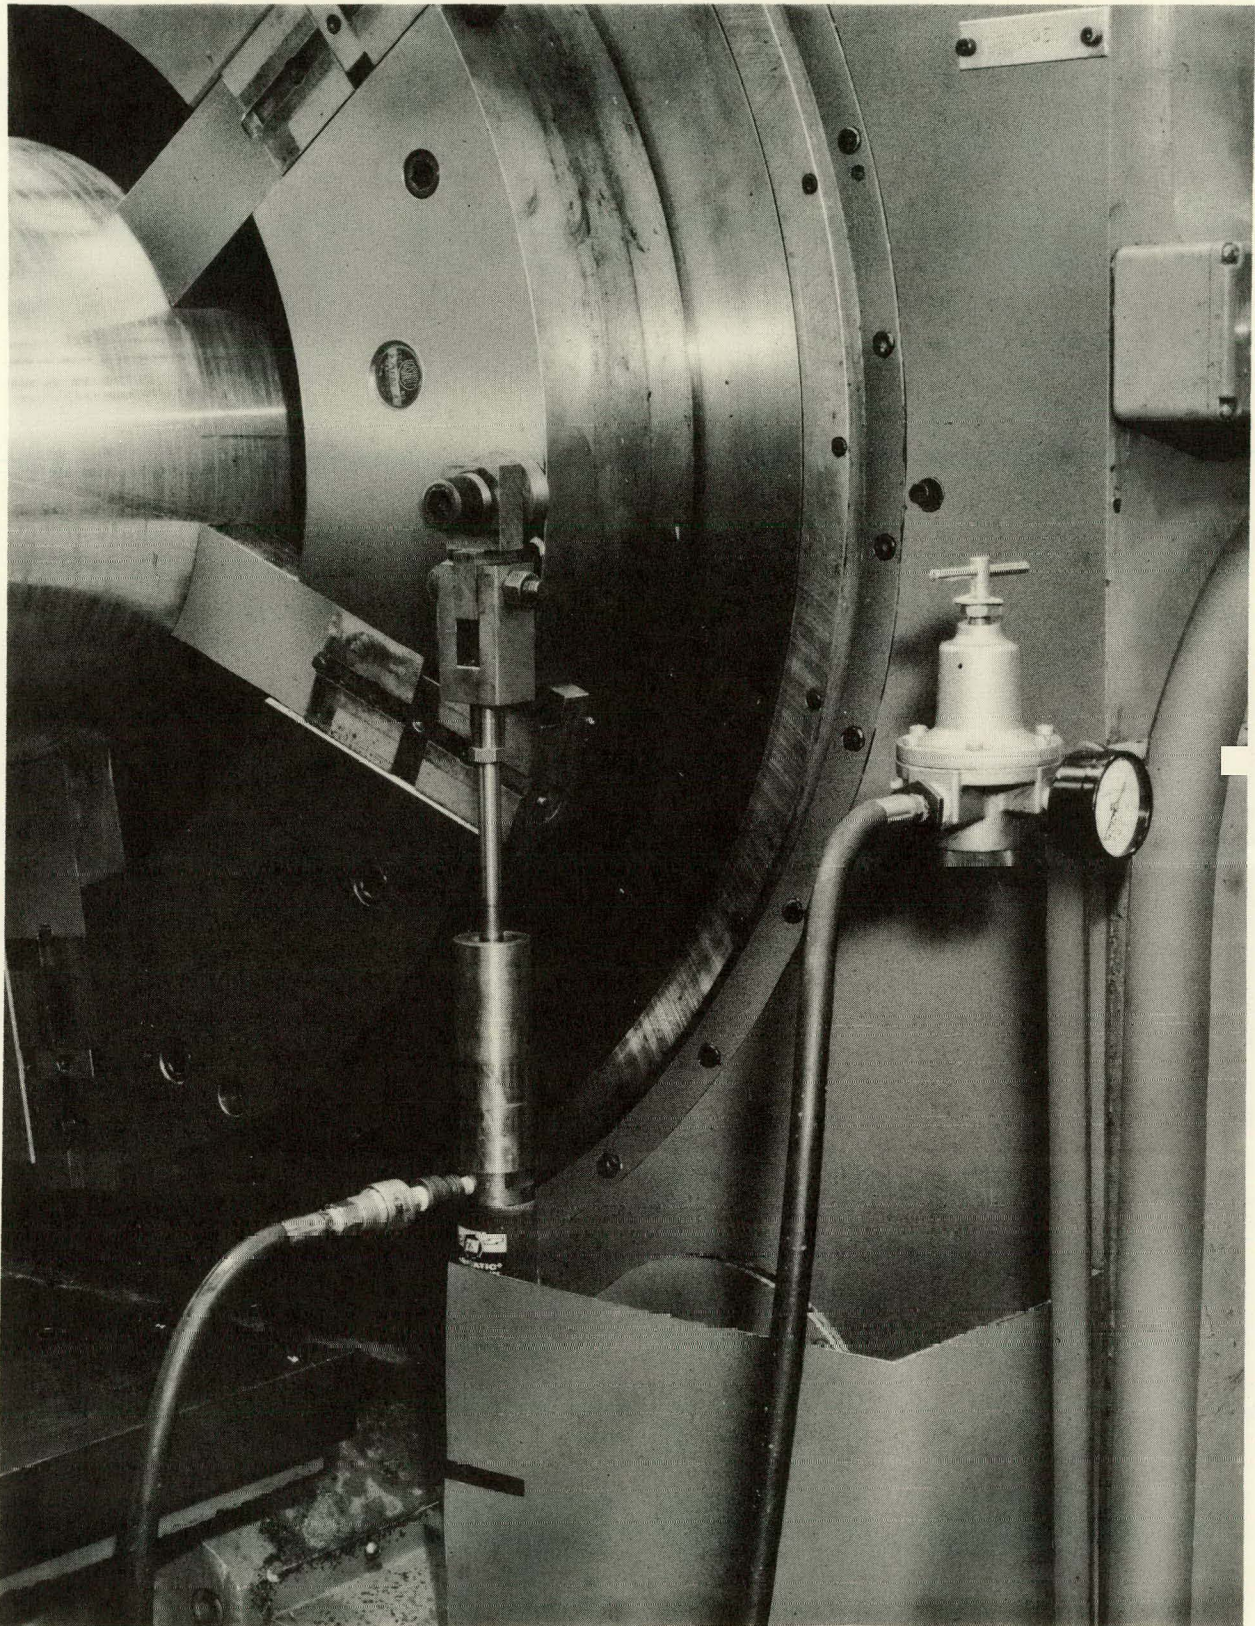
Power Attachment to Rotate the Spindle During Spiral Milling
